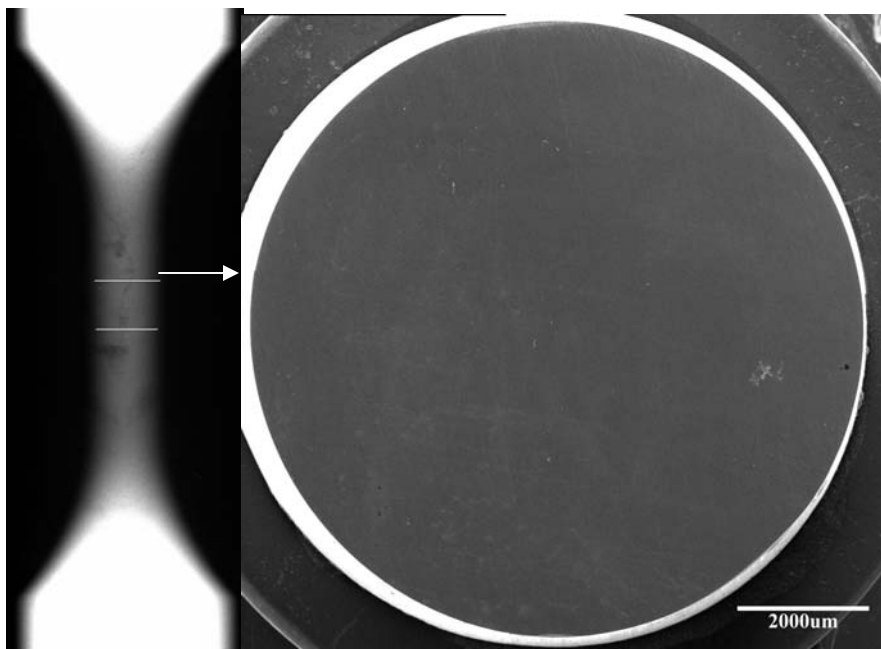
Radiograph with Indicated Fracture Zone and a Macroscopic View of a Straight Cylinder Specimen with the Fracture Surface Ground Back (Specimen B7)
